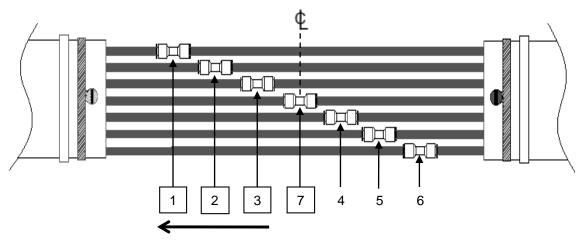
Couple Tubes 1, 2, and 3 to the Left of Center Tube 7 Coupling
